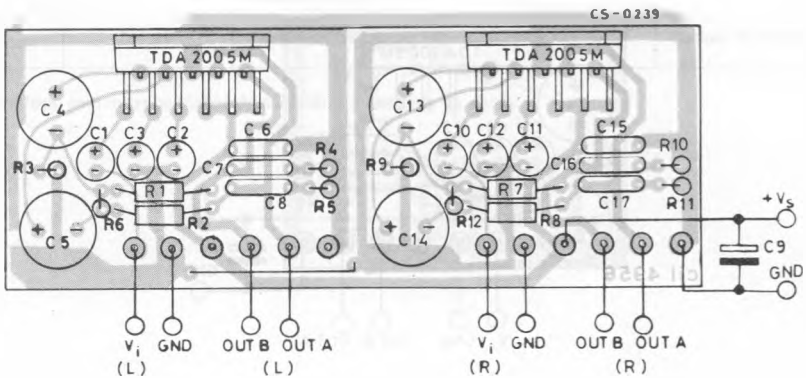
P.C. board and components layout of circuit of Fig. 25 (1:1 scale)
